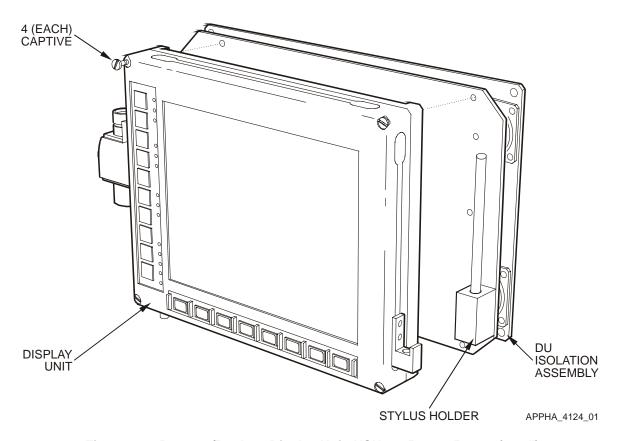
Remove/Replace Display Unit NSN 7025-01-475-0229 (10.4") or NSN 7025-01-475-0282 (10.4"/12.1")
